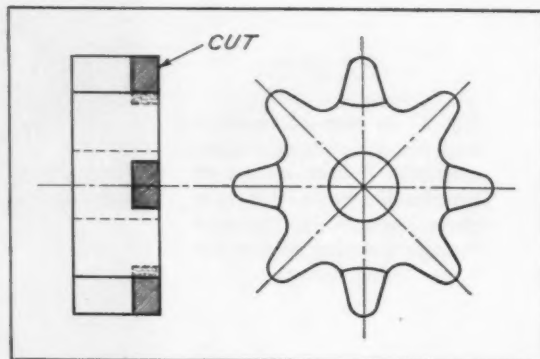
The shaded areas indicate the pinion surfaces end-milled by the tooling.
